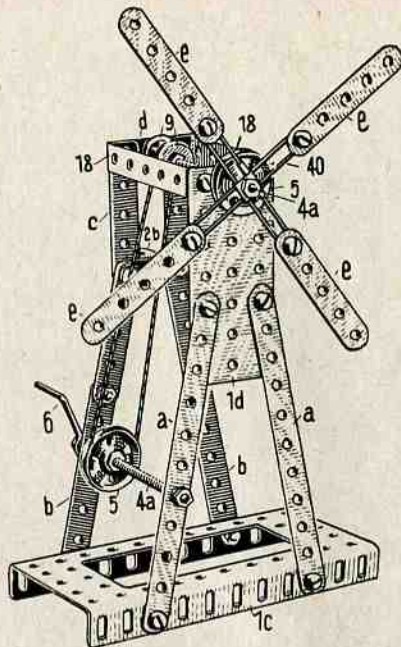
shows the connection of the stand plate 1d with the stand block c and the placement of the moving shaft No. 4.
